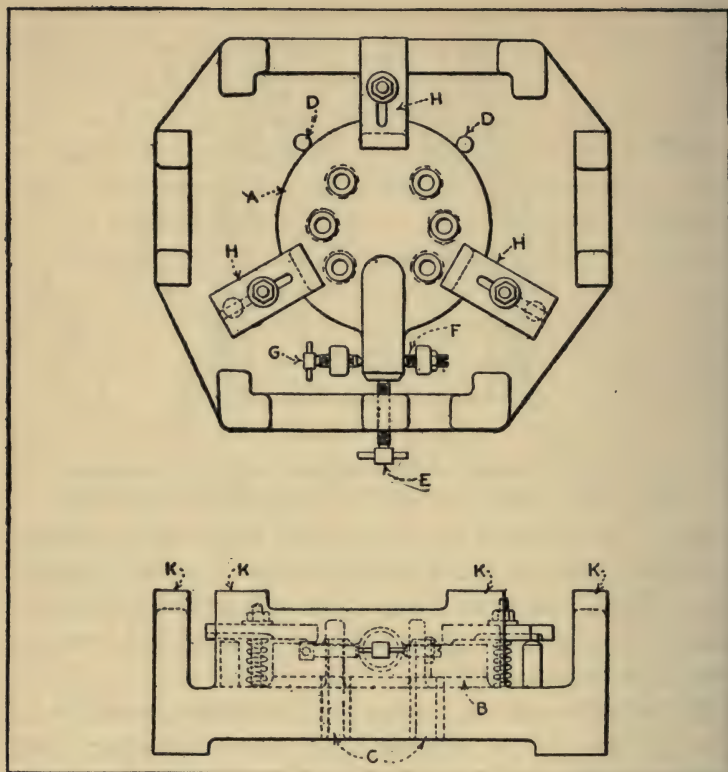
DRILL JIG FOR AN OIL-PUMP COVER
